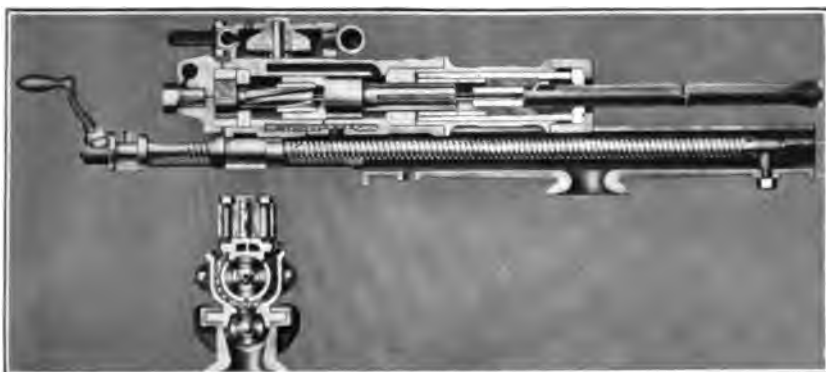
Section of piston rock drill. 1, Cylinder; 2, steam chest; 3, inlet port; 4, exhaust ports; 5, valve; 6, valve bushing; 7, valve bushing; 8, buffer; 9, check nut; 10, top head; 11, oil chamber; 12, ratchet ring; 13, rifle bar; 14, ratchet; 15, plug; 16, feed nut; 17, lock washer; 18, check nut; 19, washer; 20, feed handle; 21, yoke; 22, feed screw; 23, shell; 24, trunnion; 25, lower head; 26, clamp bolt; 27, bushing; 28, gland; 29, packing; 30, piston; 31, clamp bolt; 32, chuck bushing; 33, chuck button; 34, piston rings; 35, cylinder ports.
